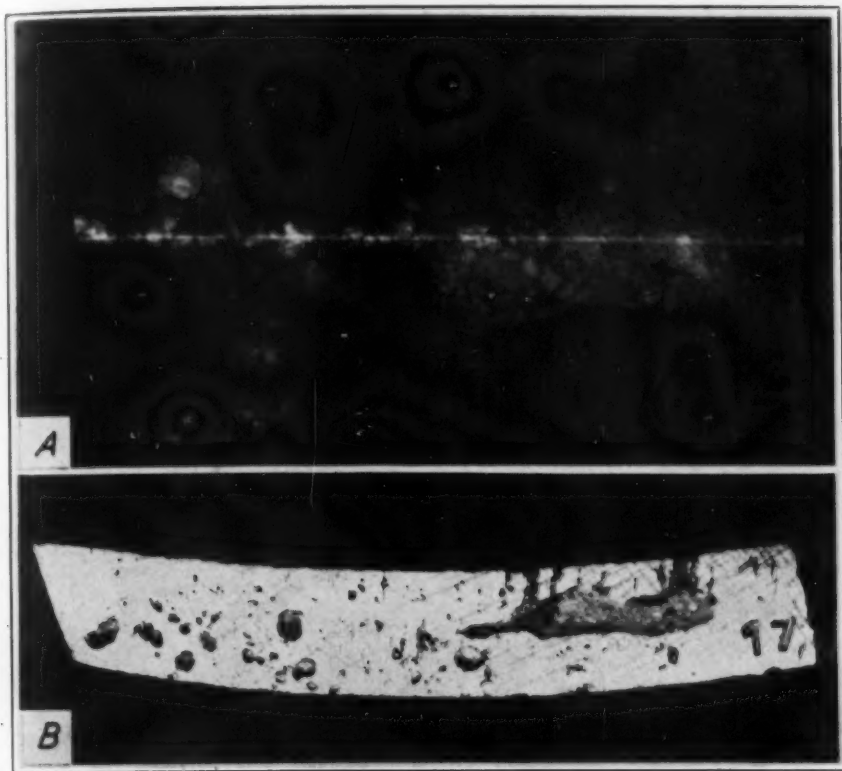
Inclusion, Blowholes, and Pinhole Porosity in Aluminum Alloy Sand Casting.
